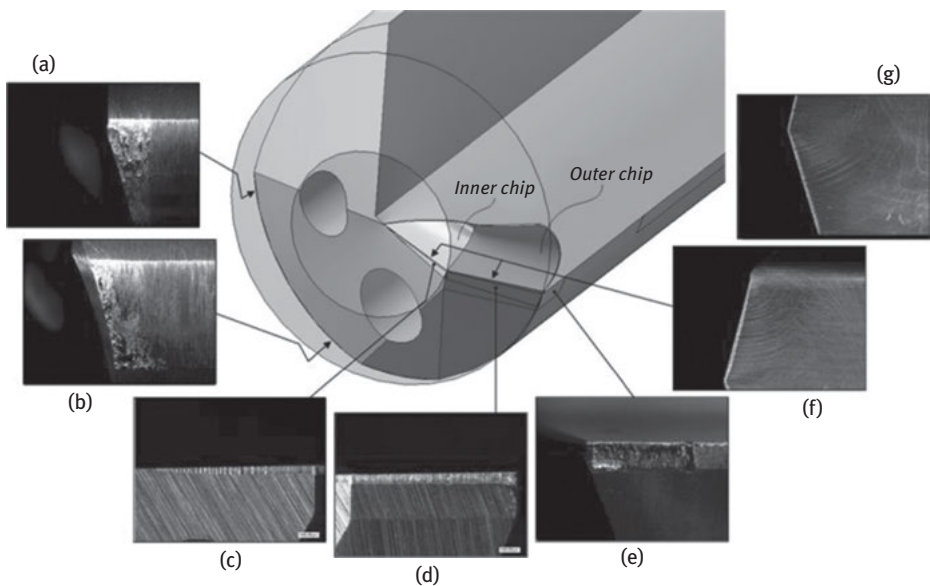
General wear on gun drills. (a) Upper bearing pad, (b) lower bearing pad, (c) inner flank face, (d) outer flank face, (e) side margin, (f) inner rake face and (g) outer rake face [21].
